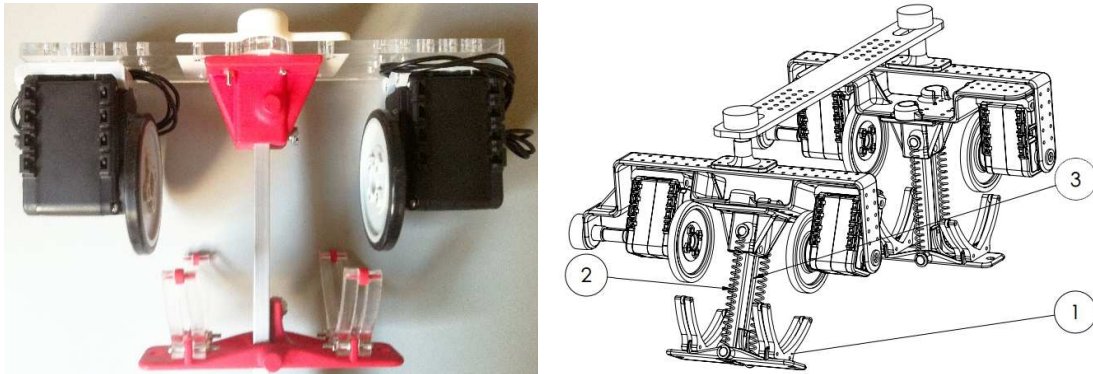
Cambot prototype for 3D scaffolds. 1-New slider for continuous contact during L junction passing; 2- Spring; 3- Linear shaft.
